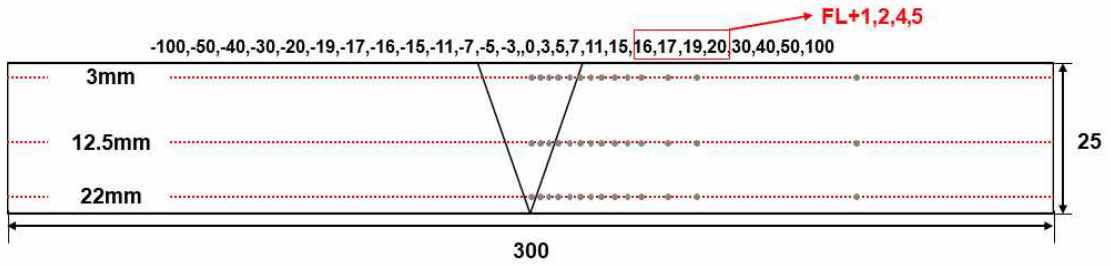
Neutron diffraction measurement points for unconstrained weld specimen
